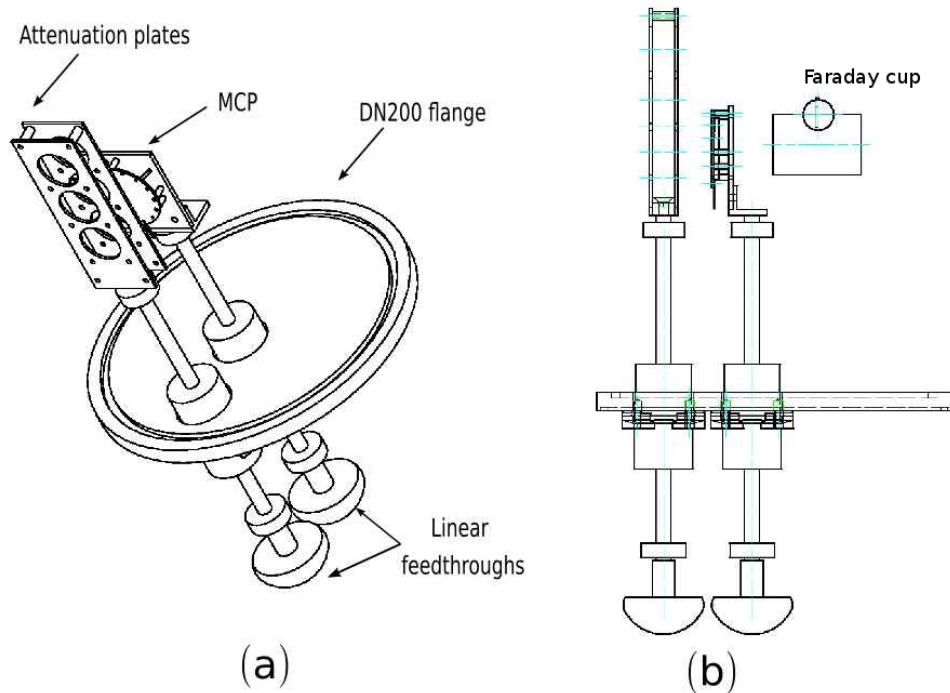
Technical drawing of the MCP and attenuation grids. In (a), a three dimensional view of the setup, and in (b), the side view.
